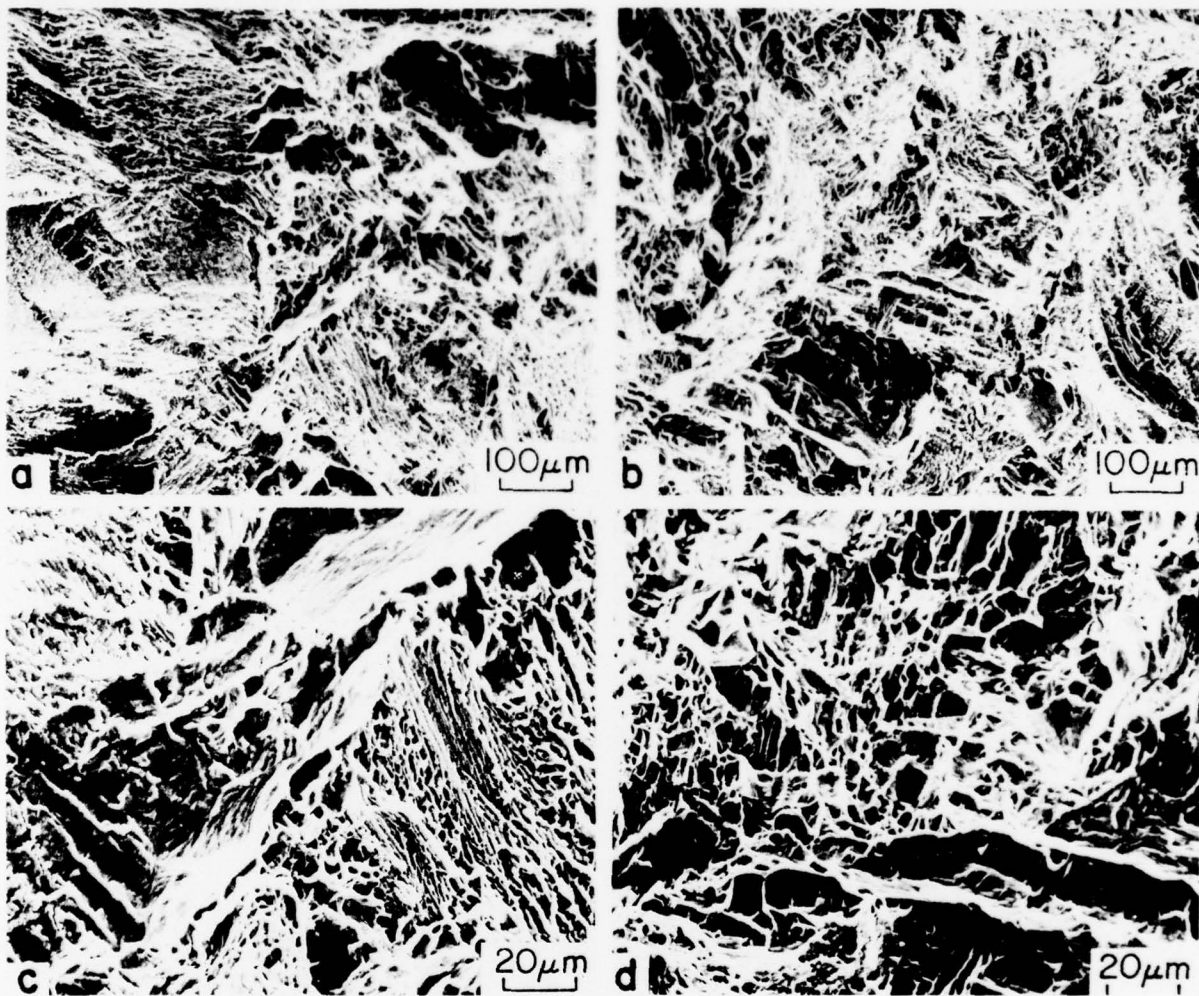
Fracture surface of Condition 4  $K_{IC}$  specimen: (a,c) fatigue precrack to rapid fracture transition; (b,d) rapid fracture.
